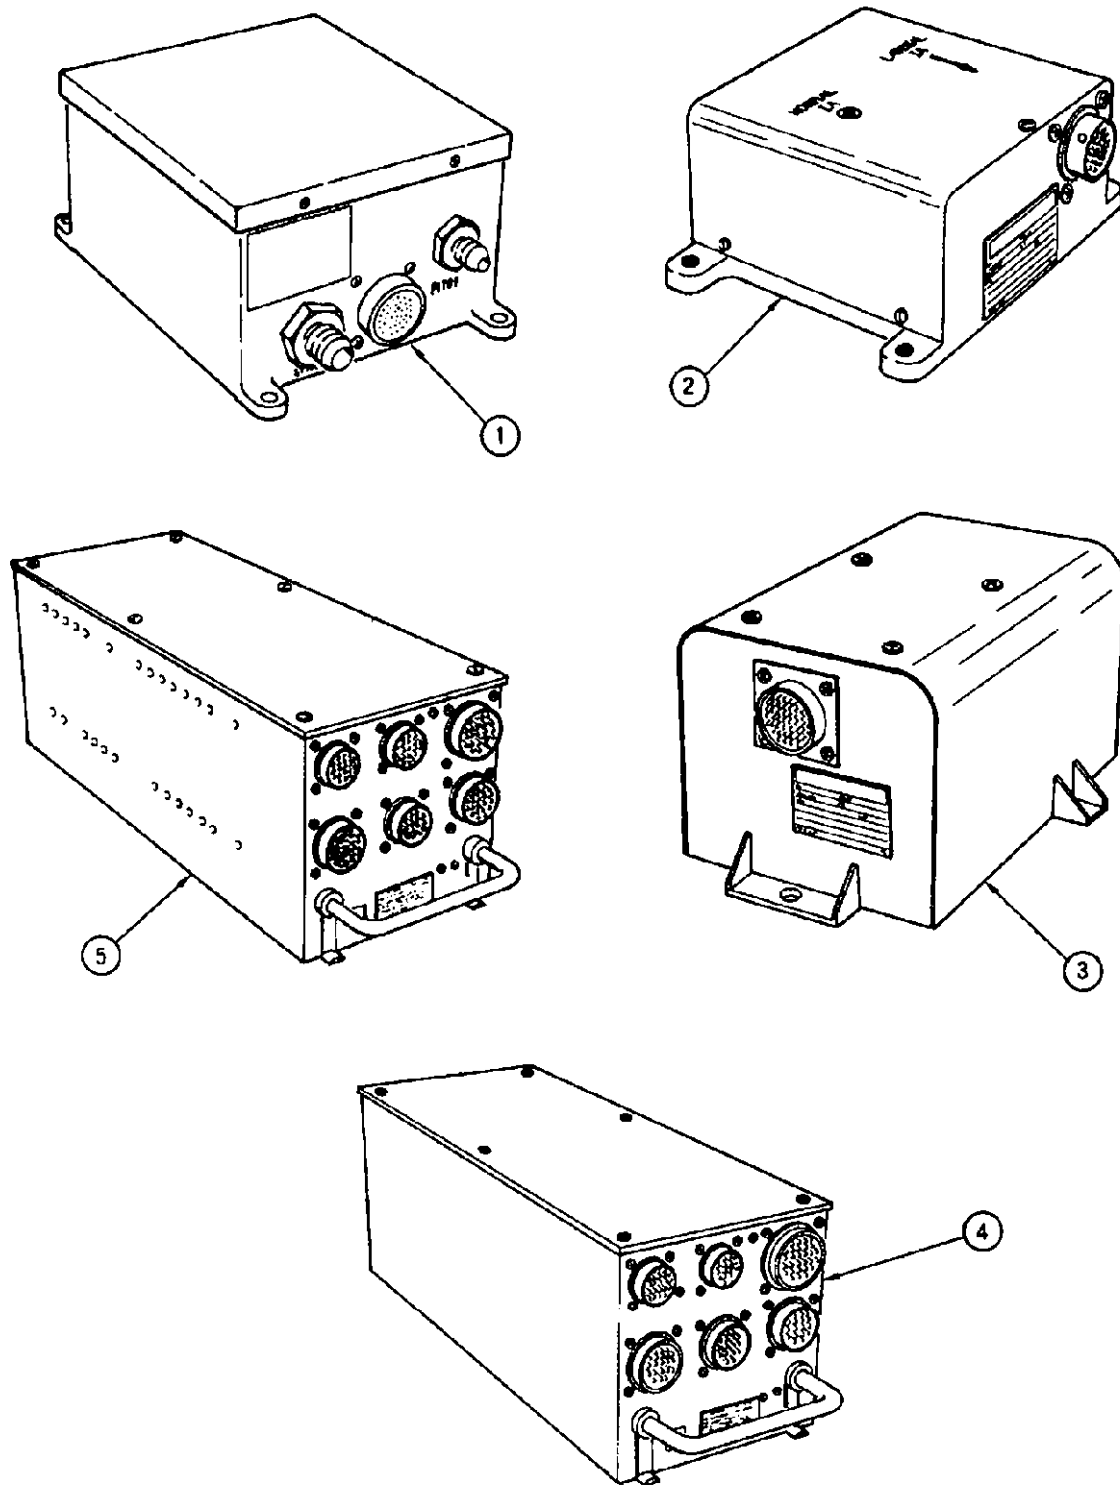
Auto Flight System Component Location (Sheet 2)
